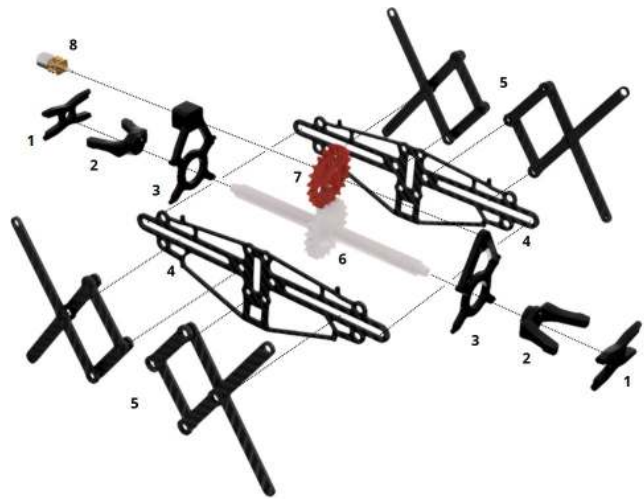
Exploded view of the deployment mechanism: (1) external lead screw supports, (2) drive nuts, (3) internal motor mount and bearing support, (4) structural sliders, (5) deployment linkages, (6) double reverse lead screw, (7) transmission gear, and (8) DC motor.
